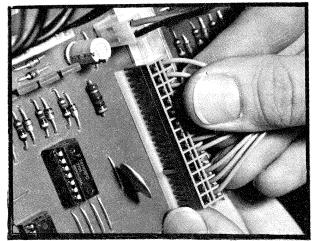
Connect Cable #8 to Jl on the Bass Driver.
